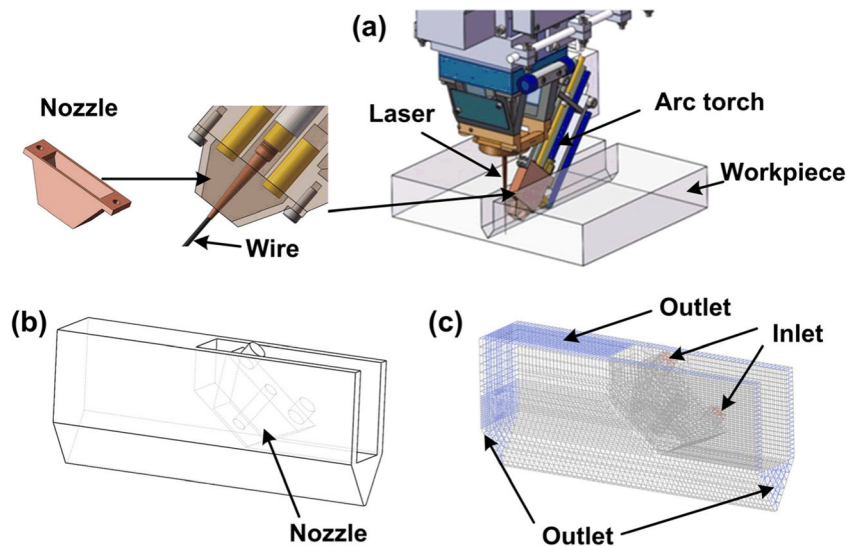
shows the CFD model for shielding gas behavior of laser-MIG hybrid welding. The arc torch was specially designed for the narrow-gap welding, as illustrated in Fig. 3a. The welding environment was modeled as the simulation domain shown in Fig. 3b. Hexahedral mesh model was constructed by adopting software of Hypermesh v11.0, as shown in Fig. 3c. The inlets of the model were configured as two circle regions in red color which were the gas inlets of the nozzle. The surfaces in blue color were set as outlets of the model and the others surfaces, i.e., the surfaces of groove, were regarded as the wall. The simulation domain was filled with air at a temperature of 25 °C and at the pressure of  $1.01 \times 10^5$  Pa, which was set as the initial condition of the model.
